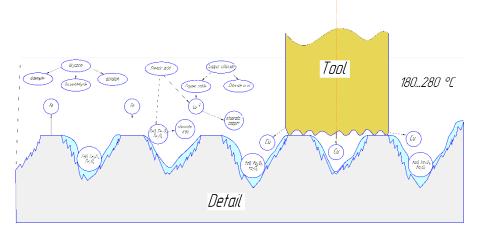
Scheme of the activation stage of workpiece and tool surfaces
